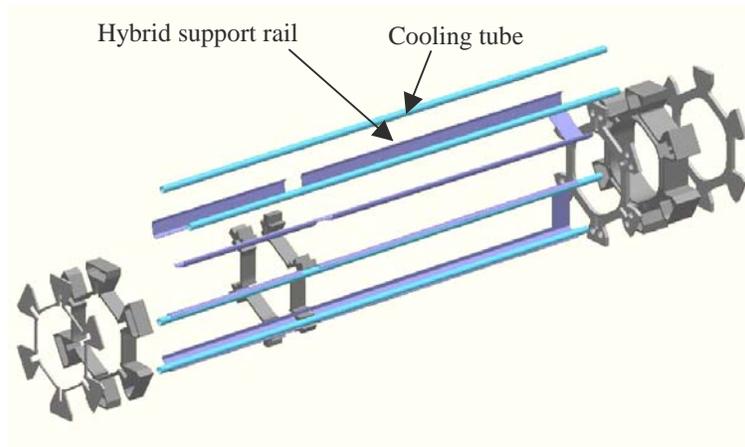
Exploded view of the support and cooling structure for the L0a hybrids. Only a few of the cooling tubes are shown for clarity.
